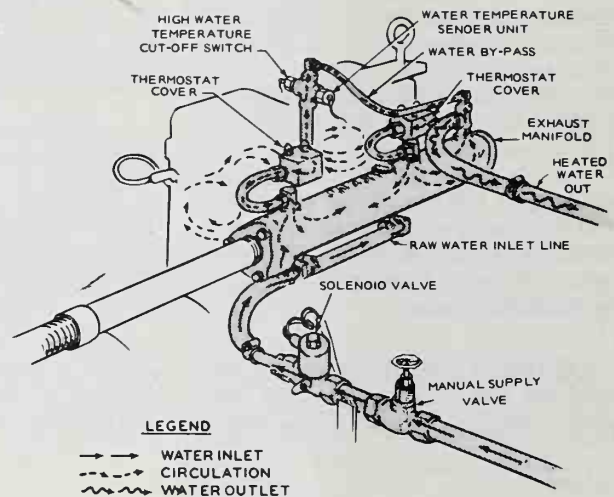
Drawing showing coolant flow on models using external water source routed through the manifold.
